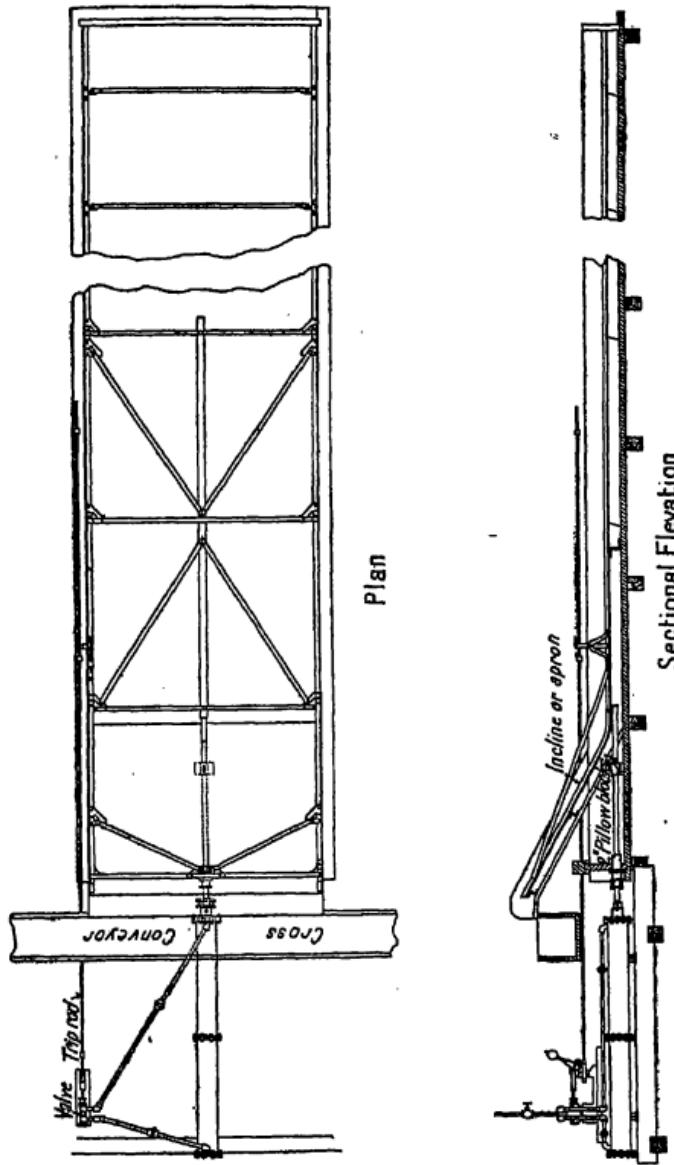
Plan and Sectional Elevation of Automatic Crystal Raker, with Hydraulic Drive.
